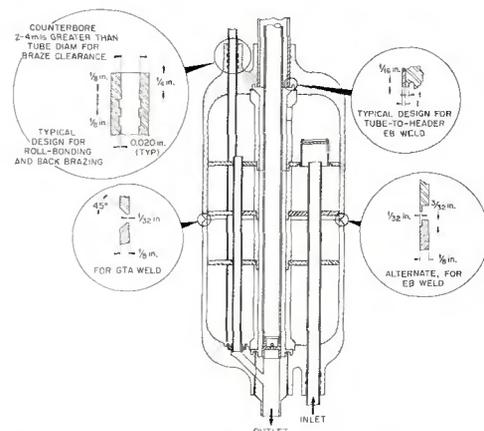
Joint designs used in fabricating molybdenum vessels
